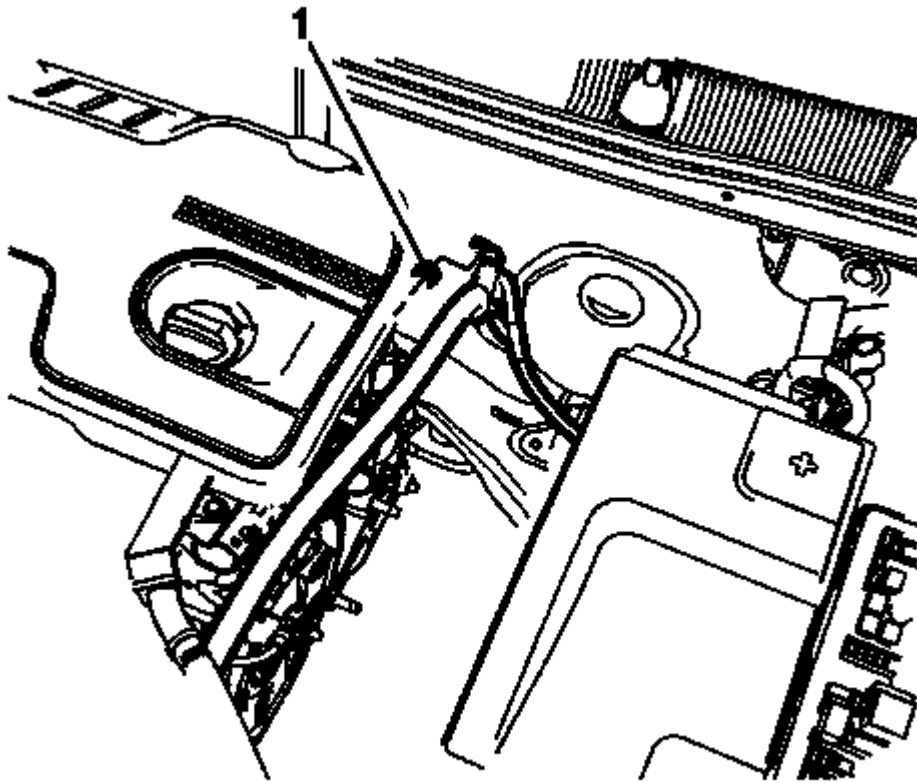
Drive Motor Generator Battery Cable Retainer Nut
